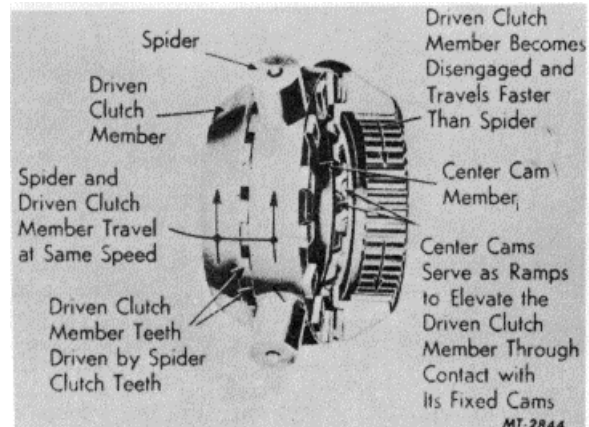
Forward Left Hand Turn (Cross Sectional View)
